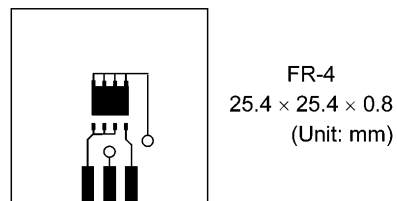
Device Mounted on a Glass-Epoxy Board (b)
